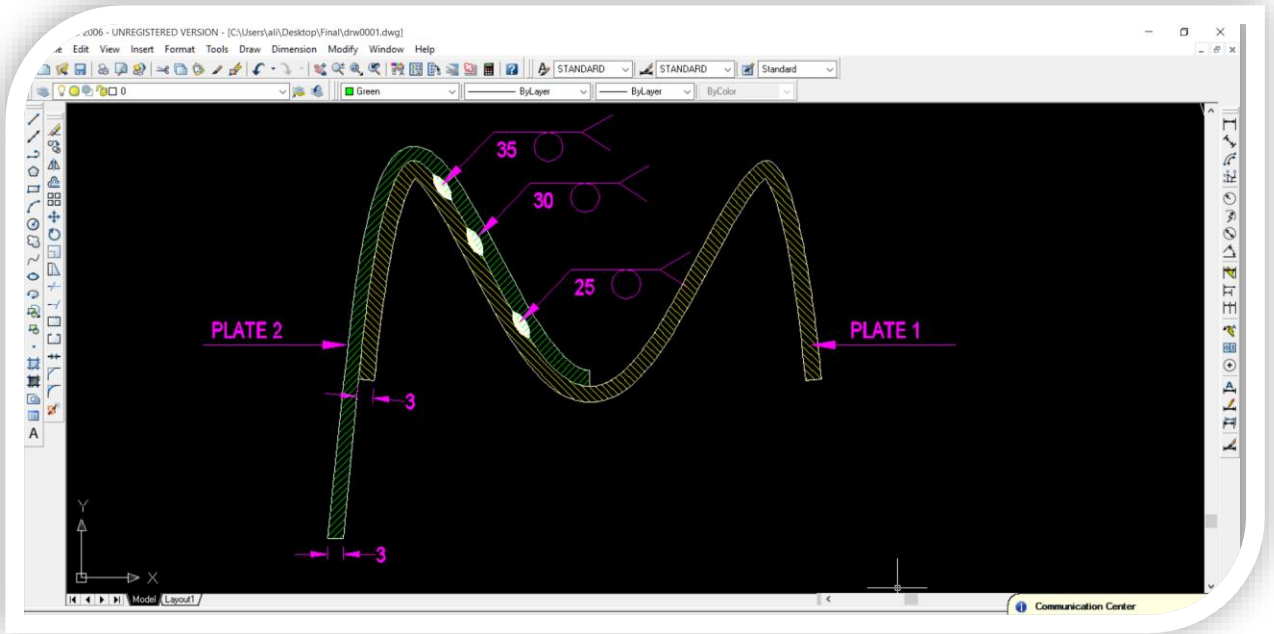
AutoCAD Drawing of three spot welds with dimensions
